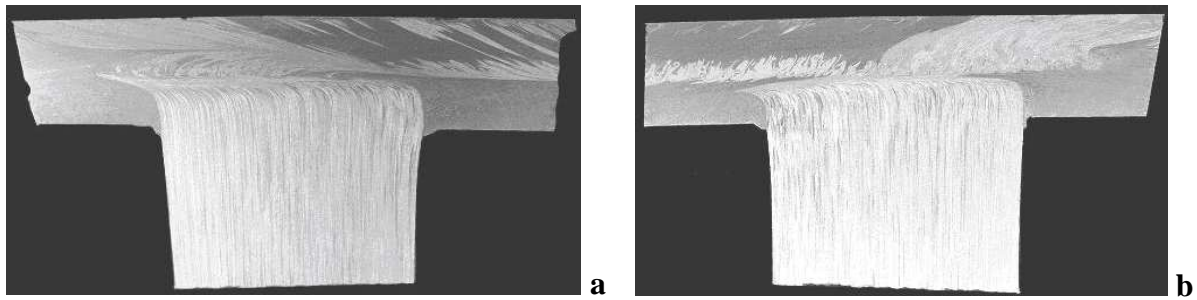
Macrostructure of FSW weld: a - initial welding area, b - final welding area, Keller etching, magnification 8x [6]
